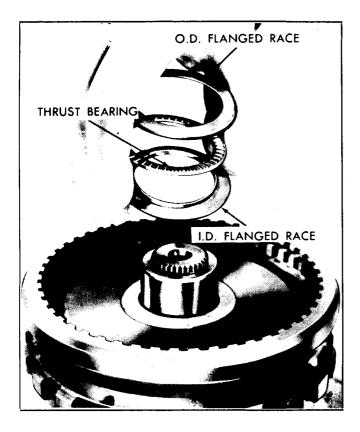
E-168 Installing Bearing and Races on Rear Internal Gear
